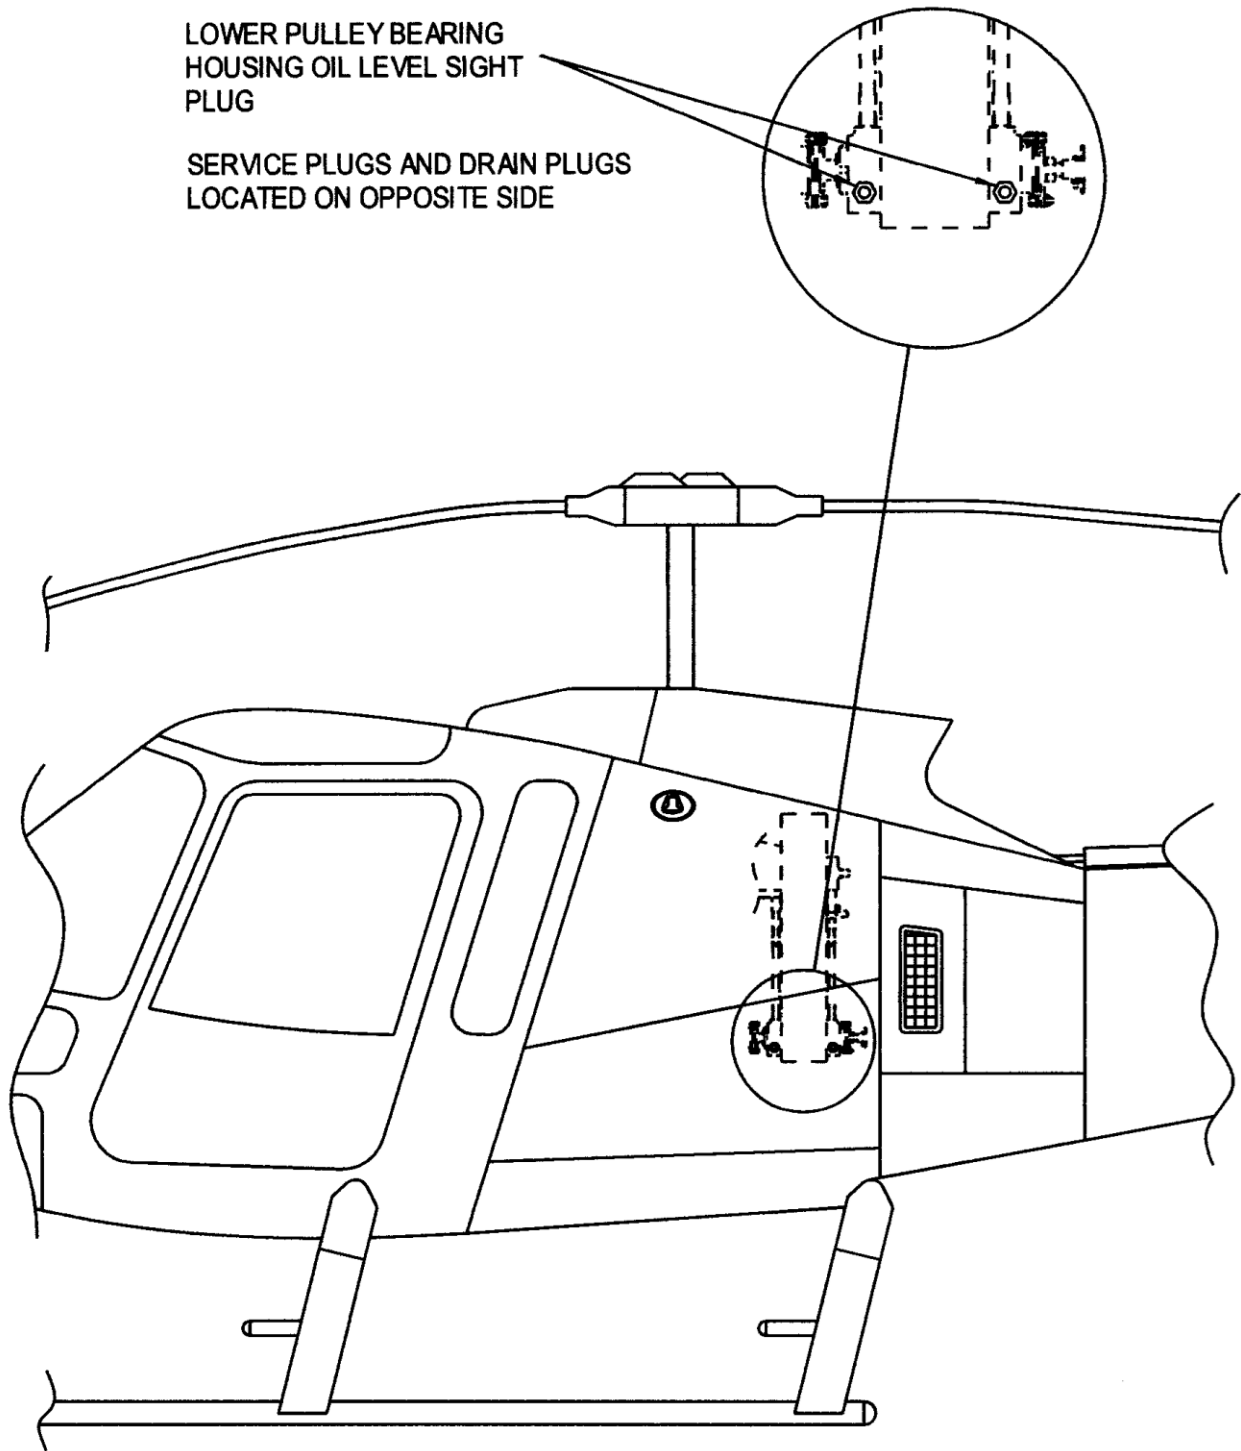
Oil Lubricate Lower Pulley Bearings
